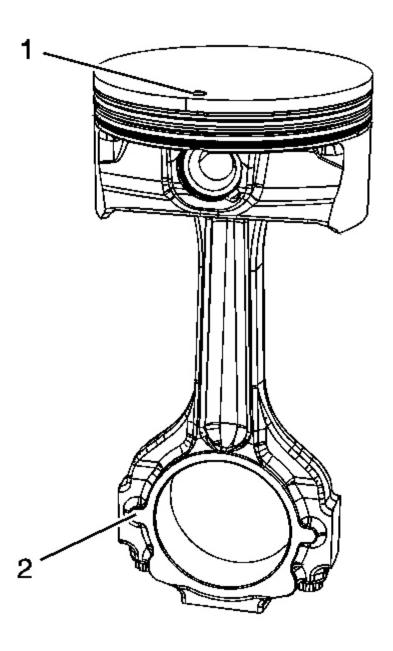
Identifying Proper Piston Installation Direction Courtesy of GENERAL MOTORS CORP.
